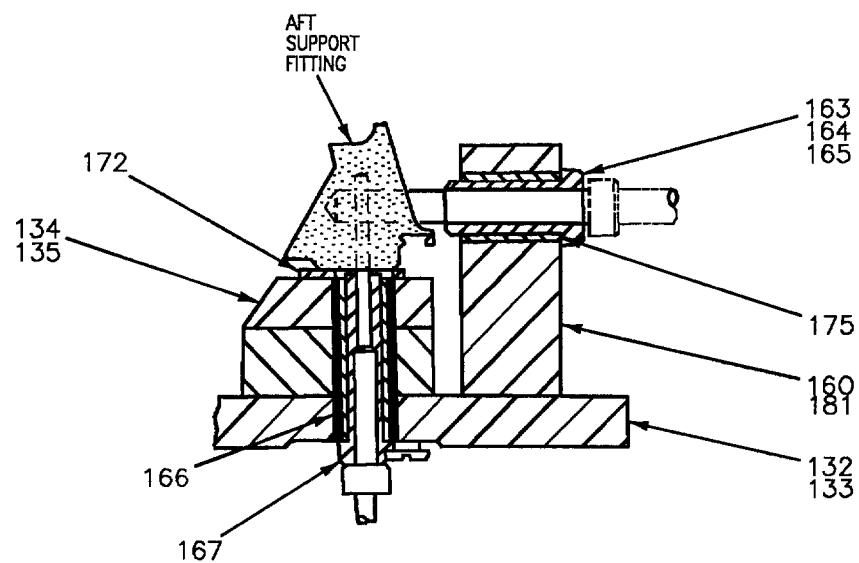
Inspection or Replacement - Aft Support Fitting (Sheet 3)
